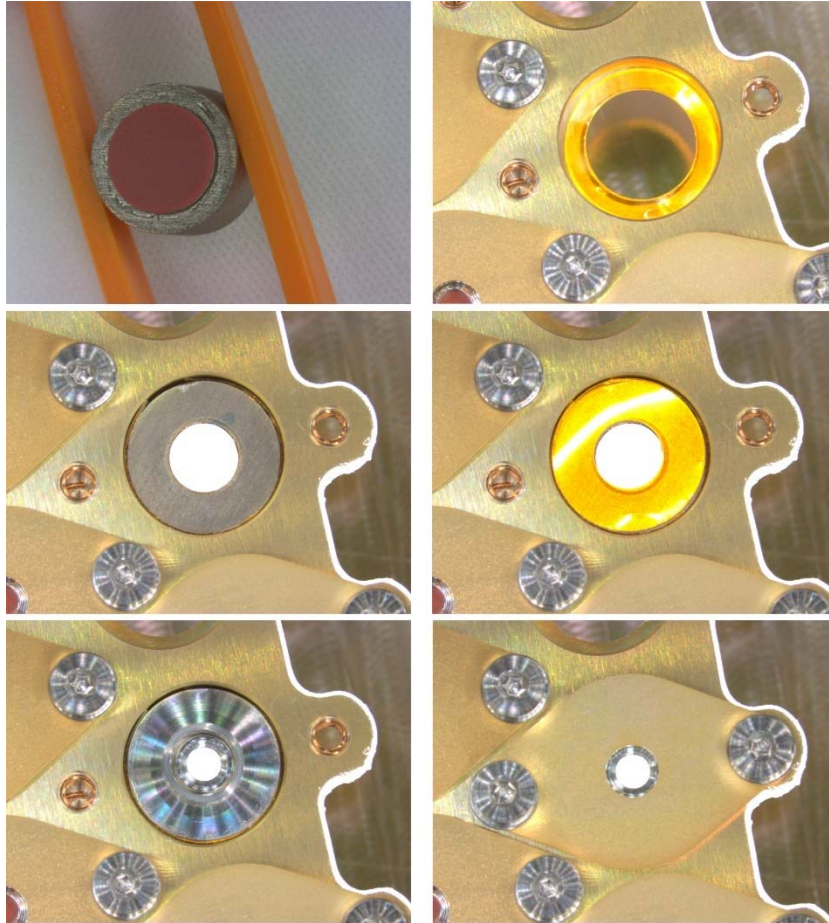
ASSEMBLY PROCESS OF RED PASSIVE SAMPLE
